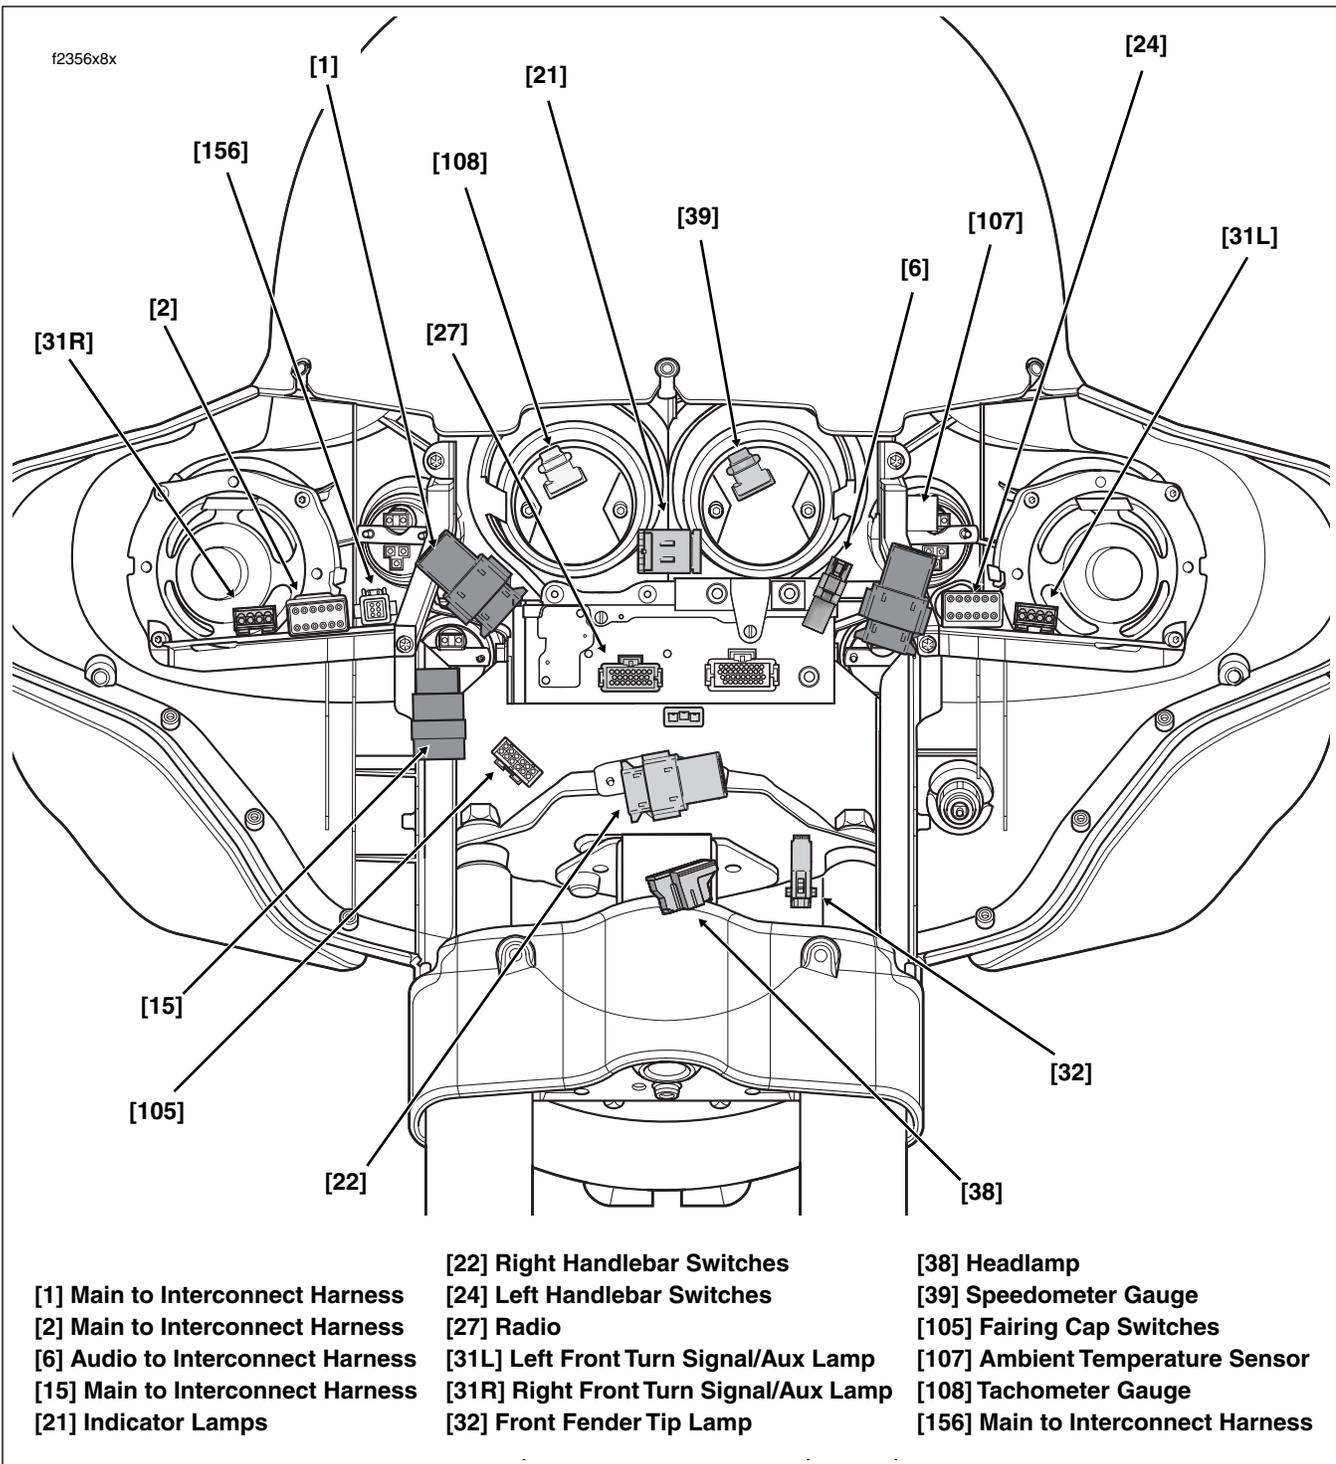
Inner Fairing - Interconnect Harness Connectors (FLHX, FLHT/C/U)
